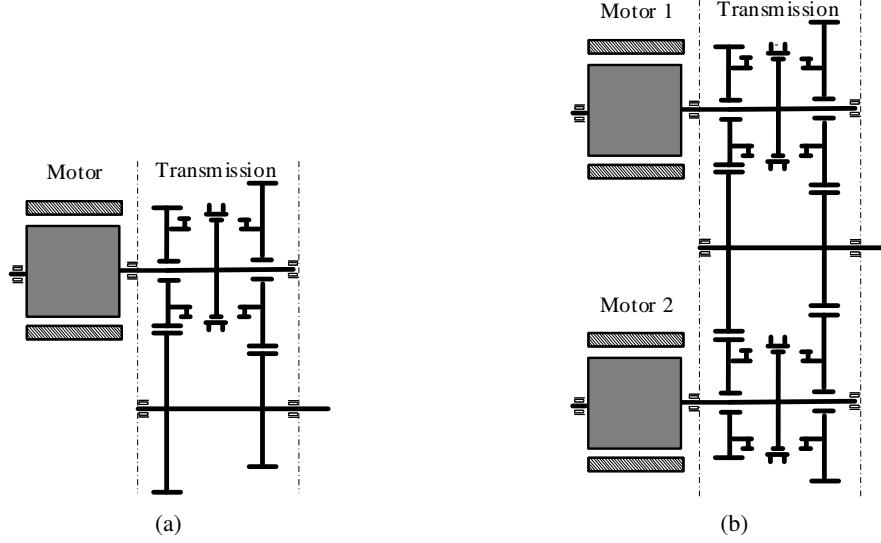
Mechanical structure. (a) SEMT with 2 gears. (b) DEMT with 2+2 gears.
